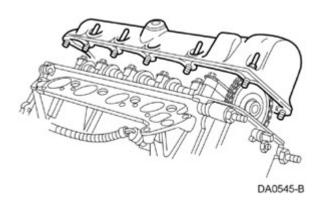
Identifying Valve Cover Courtesy of FORD MOTOR CO.
